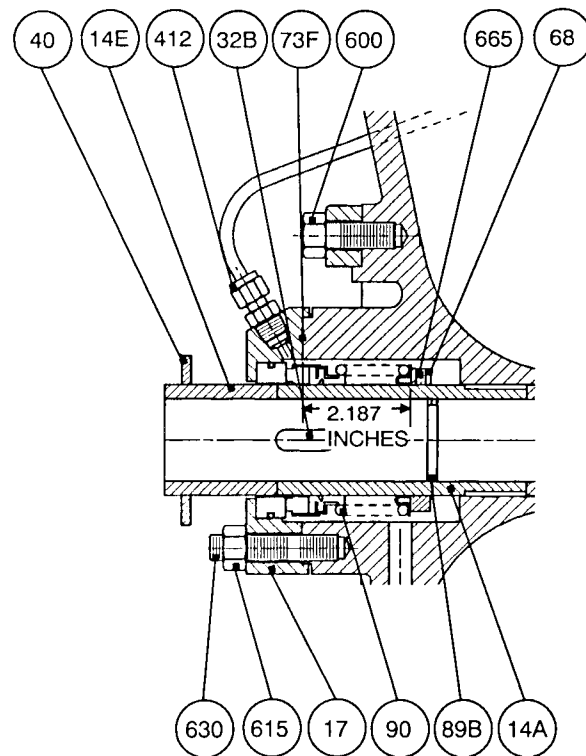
B. Mechanical Seal, WKM-80 Standard Design
